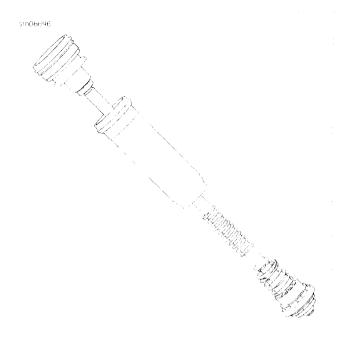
Piston Rod Assembly with Rod Case Guide
